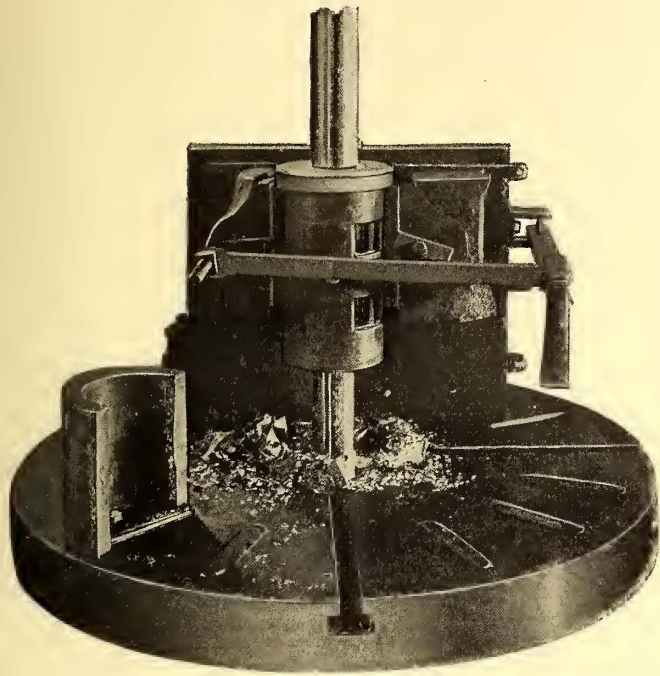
JIG AND CUTTER BAR FOR BORING BEARINGS ON A DRILL PRESS
